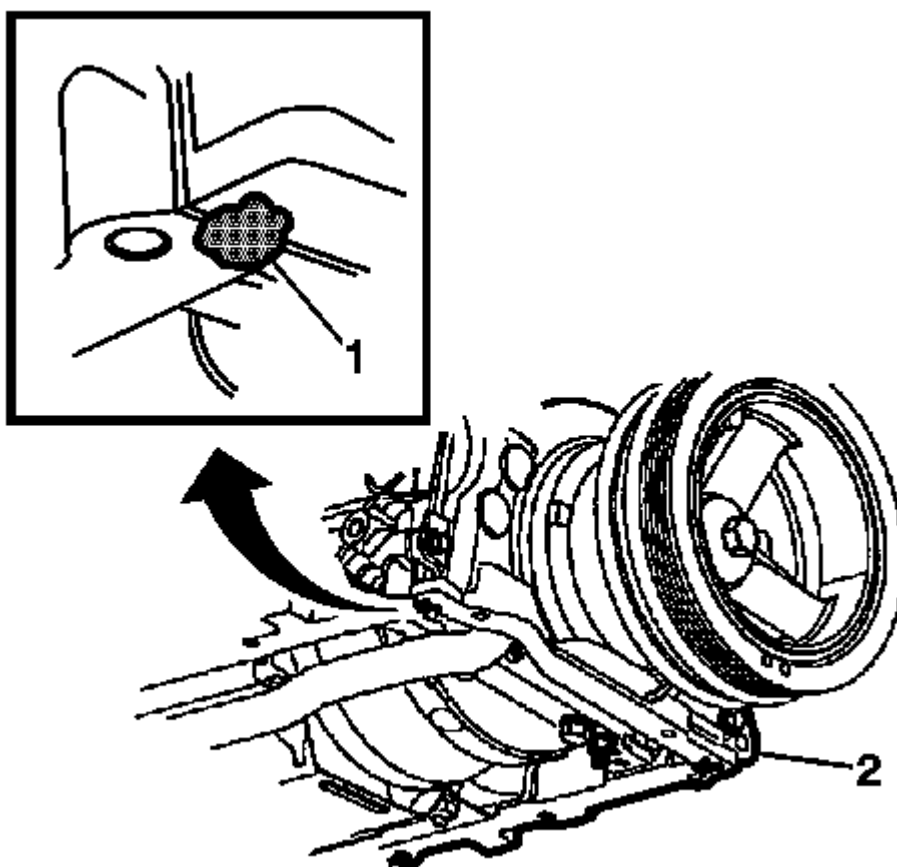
View Of Sealant Applied To Front Oil Pan-To-Engine Block Junction
